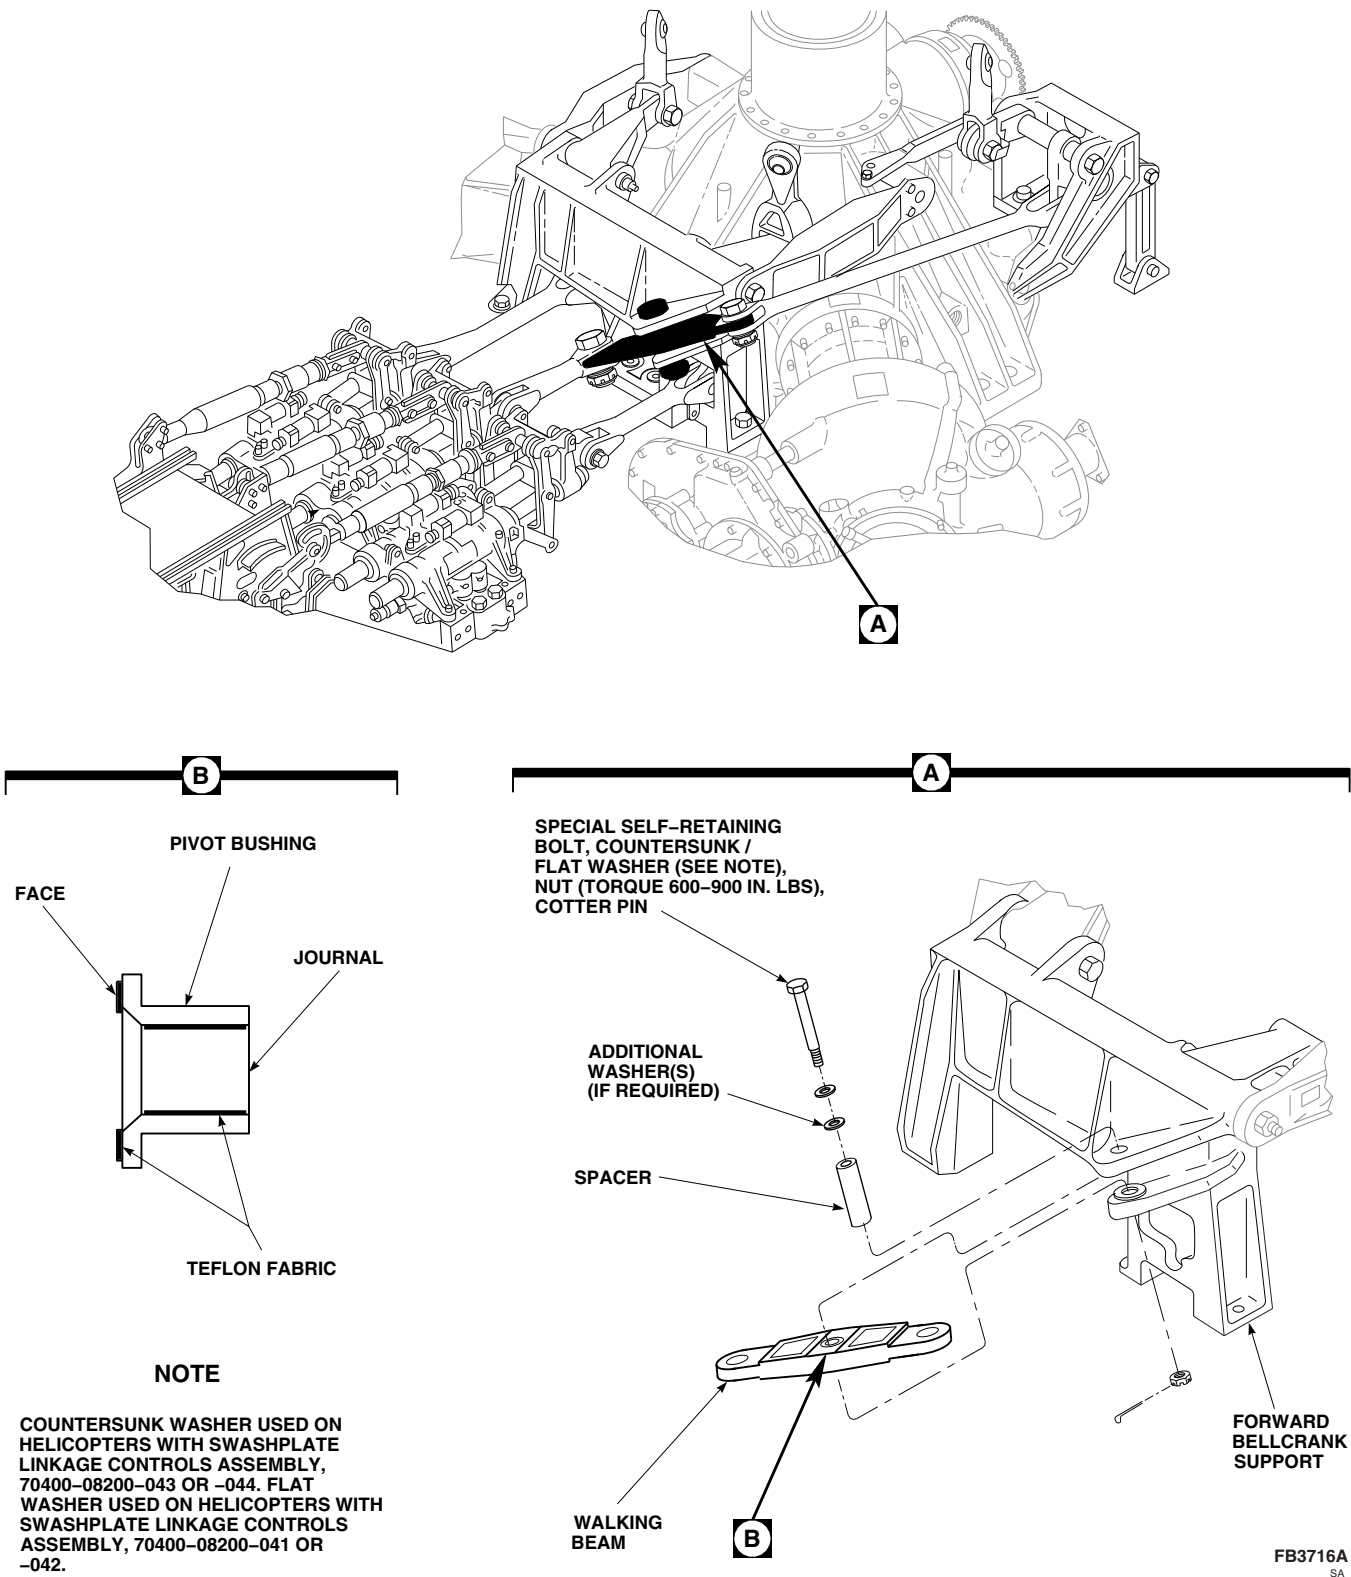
REPLACE WALKING BEAM
